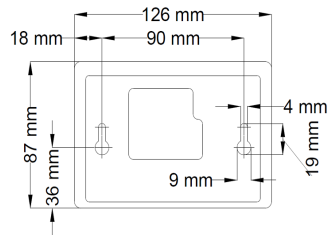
Dimensions of the panel's back part for wall assembly.
